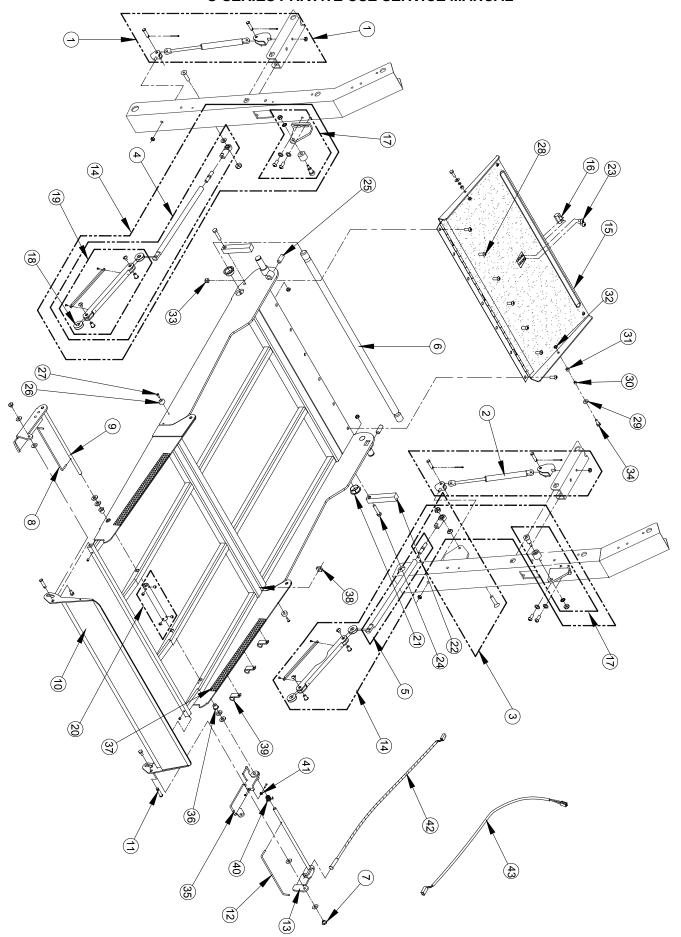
PRIVATE USE FOLDING PLATFORM ASSEMBLY, K1205
